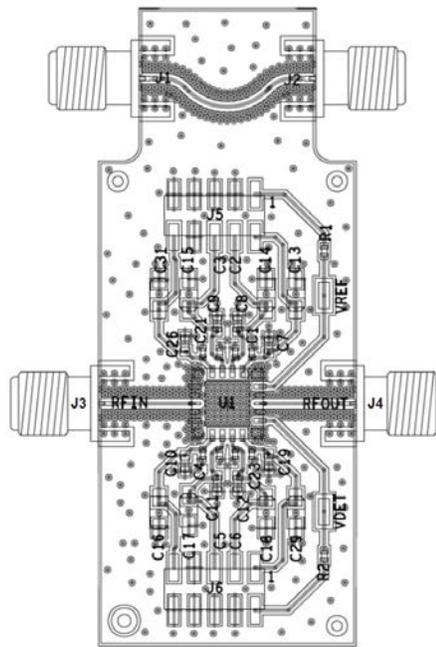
ADPA7007-EVALZ Assembly Drawing (Note That J1 and J2 Are Not Installed)
